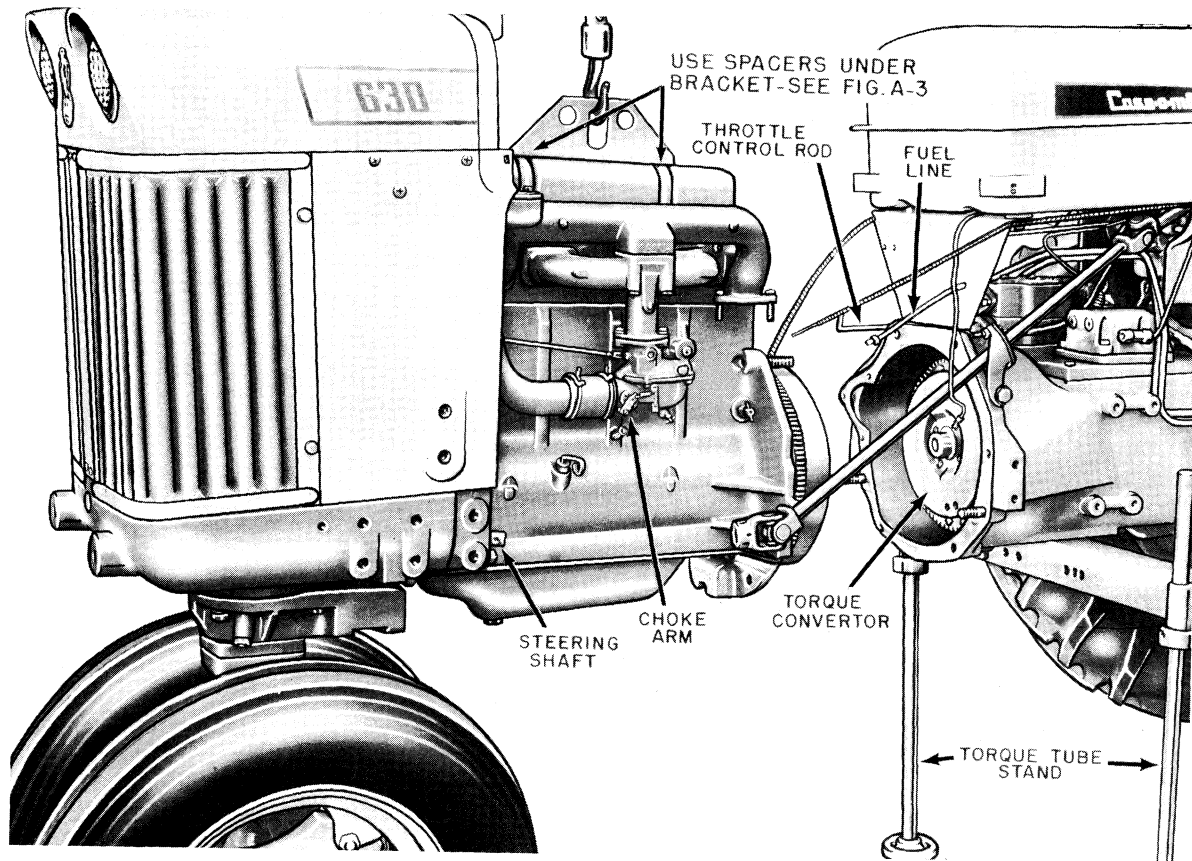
Case-O-Matic Drive Tractor - Split Between Engine and Torque Tube
